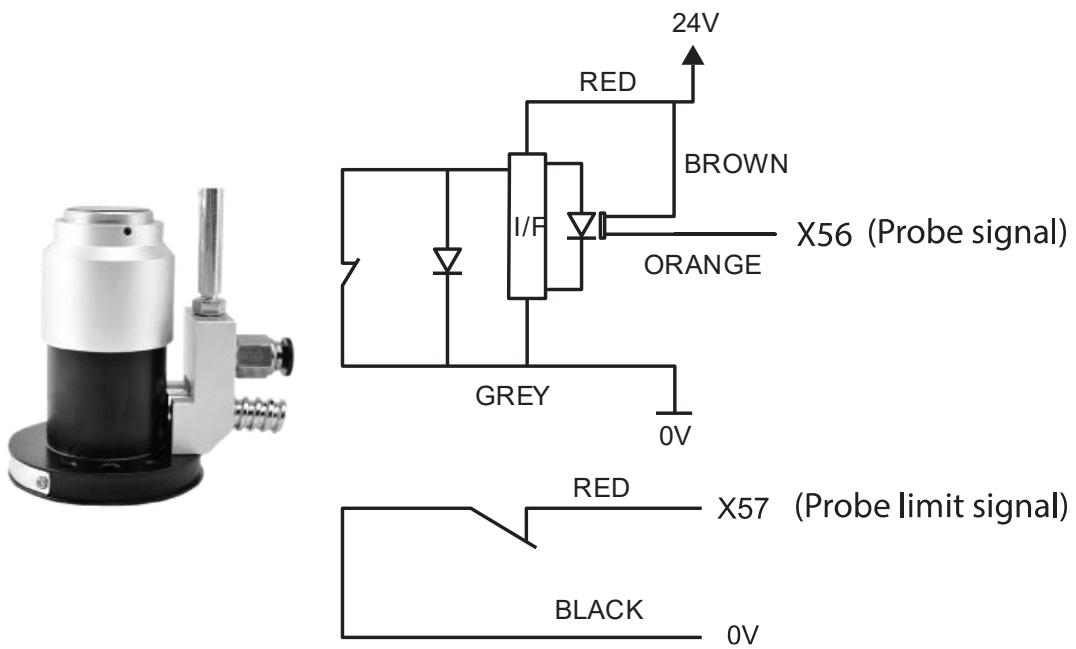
Tool length sensor wiring diagram (6 wires-PNP)
